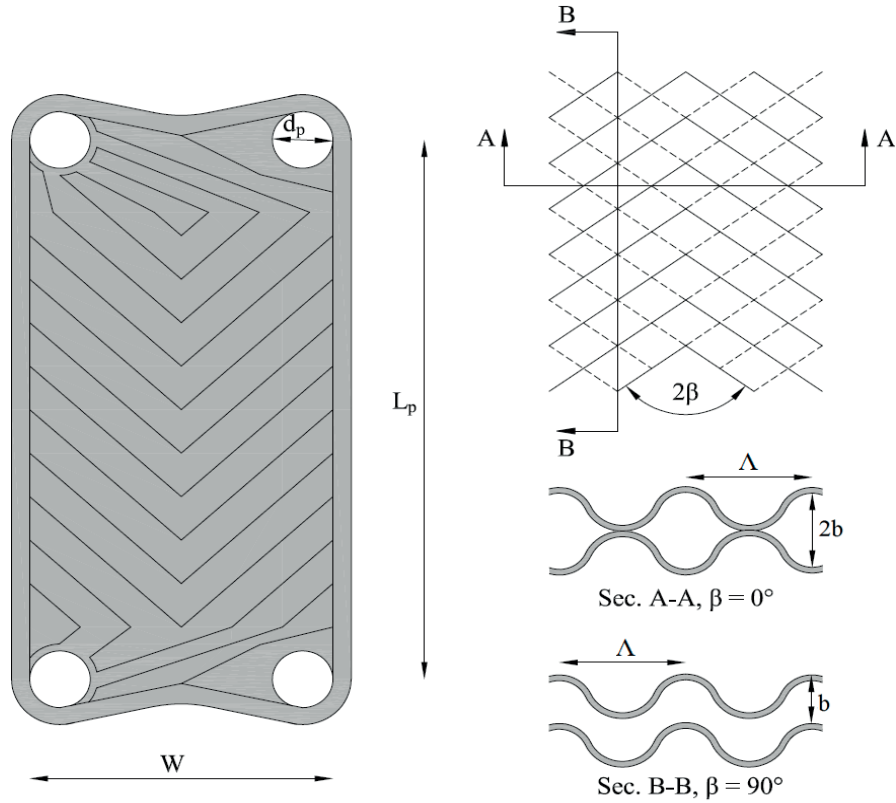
Drawing of the chevron plate prototype and the related geometrical parameters.
